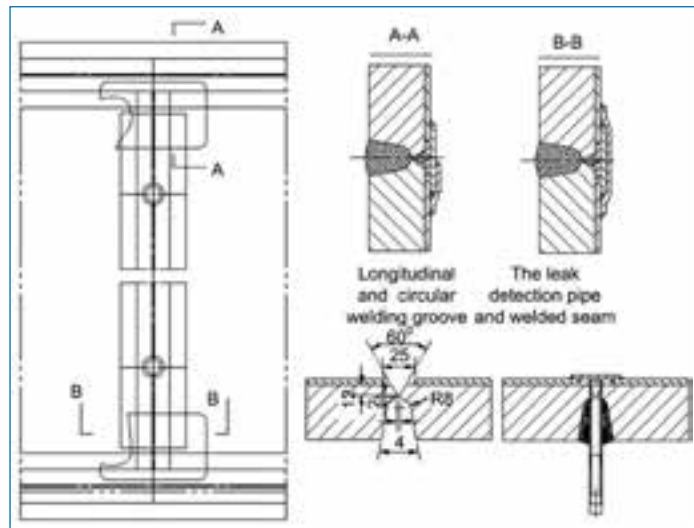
The welding of the zirconium and steel composite plate.
